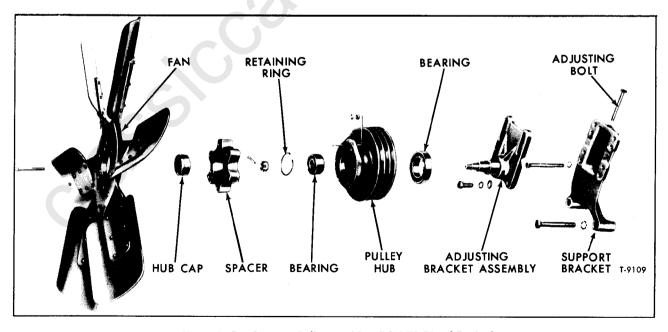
Fan Support, Pulley, and Fan (12V-71 Diesel Engine)
